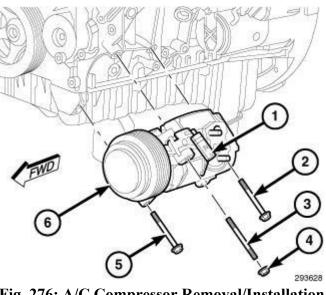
A/C Compressor Removal/Installation Courtesy of CHRYSLER GROUP, LLC
